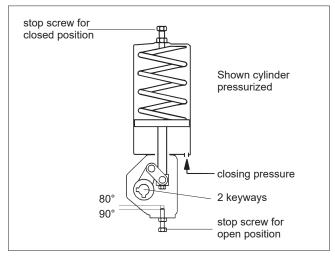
Example of spring-to-open pneumatic actuator stop screw adjustment in B1J series
